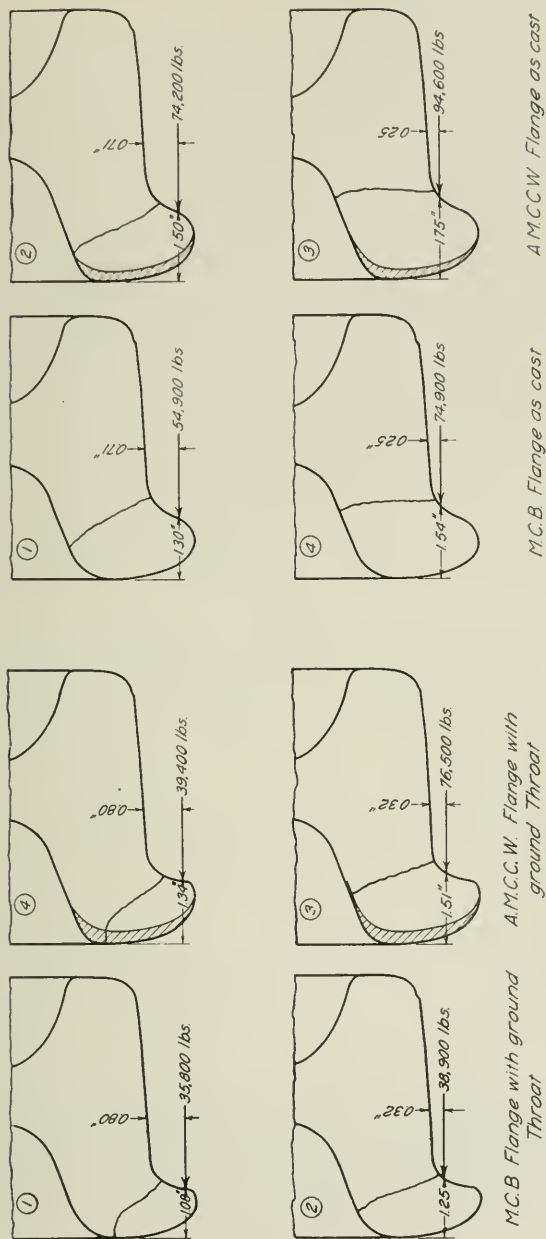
725-LB. M. C. B. WHEEL No. 132 648.
